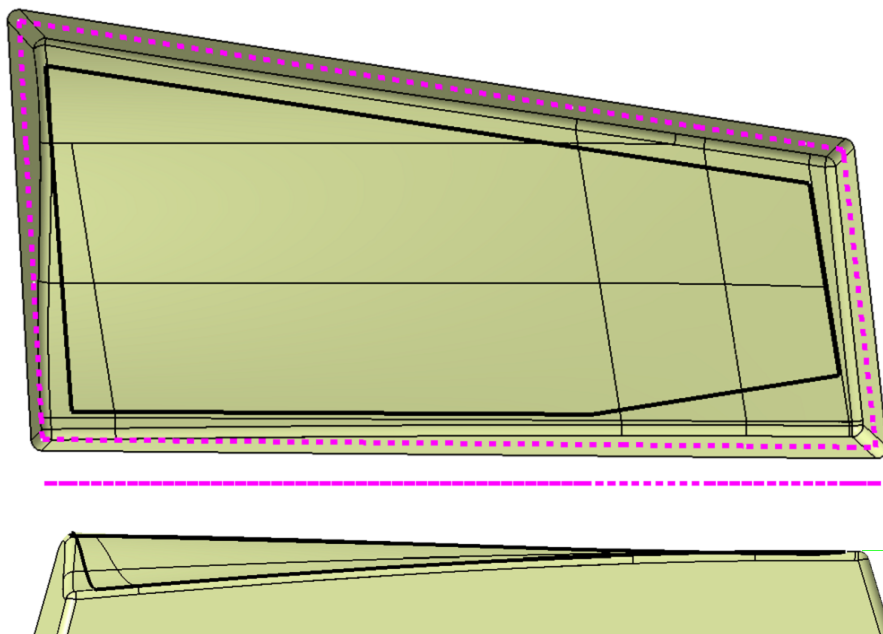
Concept-1 Tool and Blank – Top and Side Views
